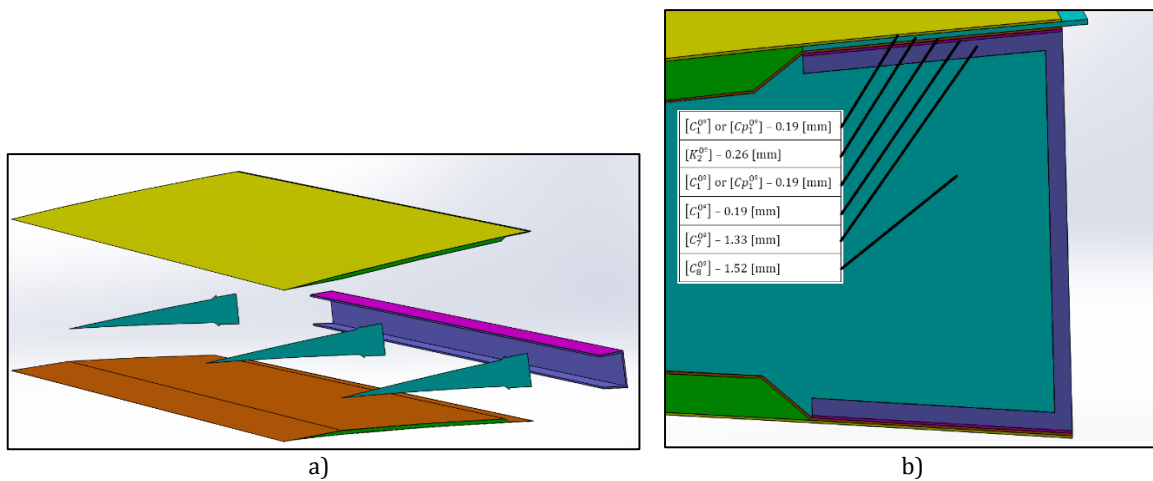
Flap or Aileron: a) Components exploded view; b) Detail: close-up on the plies that constitute each component.
